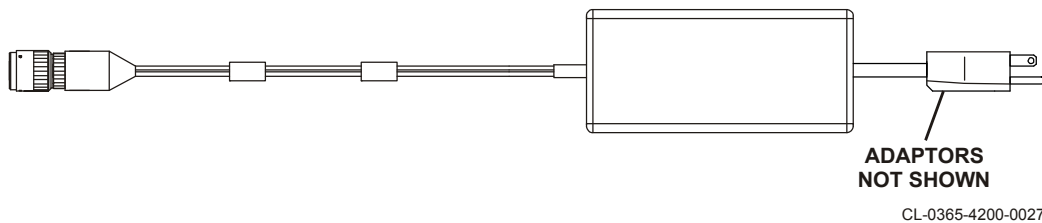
BGAN, AC to DC Power Supply Assembly, 12043-0844-A1
